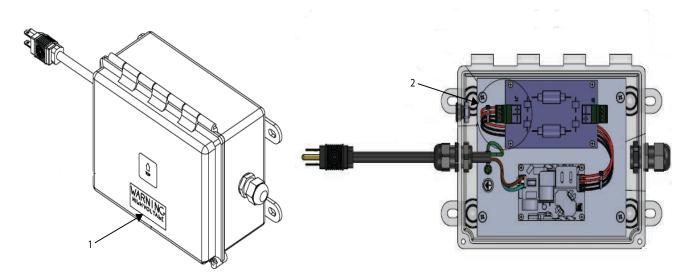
12 VDC Remote Power Supply Replacement Parts
